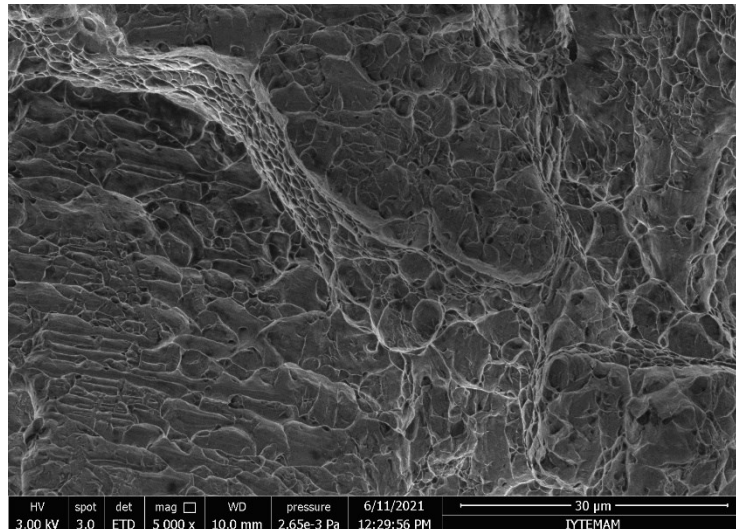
Location of lack of fusion defects on the fracture surface of EBM-Ti64 tensile specimens.
